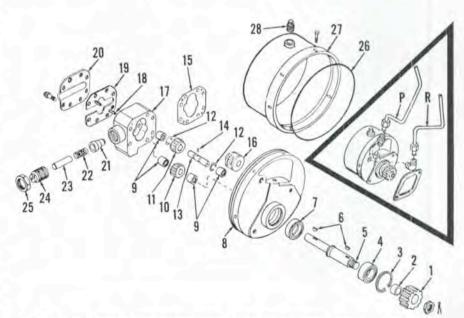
Exploded view of power steering pump used on Models MF230, MF235 and MF245 equipped with diesel engine. Pump used on Models MF240 and MF250 is similar except dusi springs are used on relief valve and spring guide pin (23) is not used. Inset shows location of pressure line (P) and return line (R).
